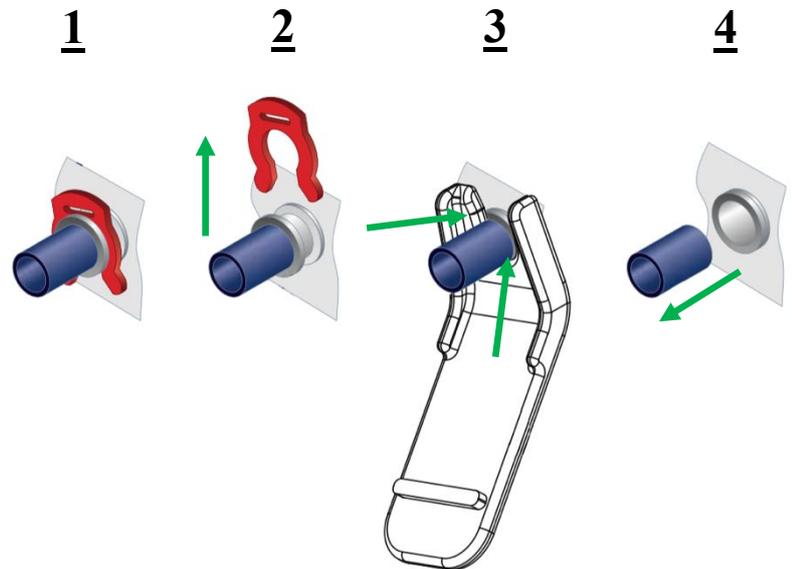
Disconnecting tubes and closing plugs from quick-release fittings on the Device casing.
